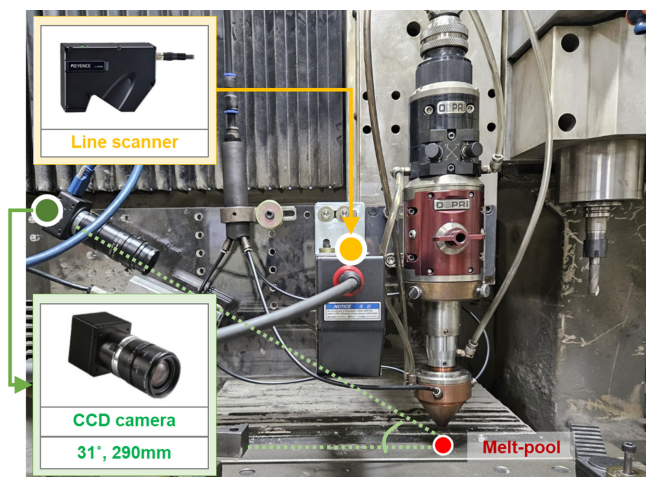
Photo of the sensor module using two non-contact sensors - CCD camera and laser displacement sensor
